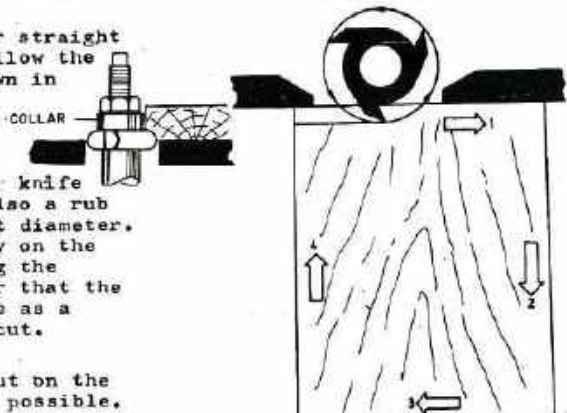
SHAPING AGAINST COLLAR AND STEPS HOW TO SHAPE ALL FOUR EDGES OF A BOARD
